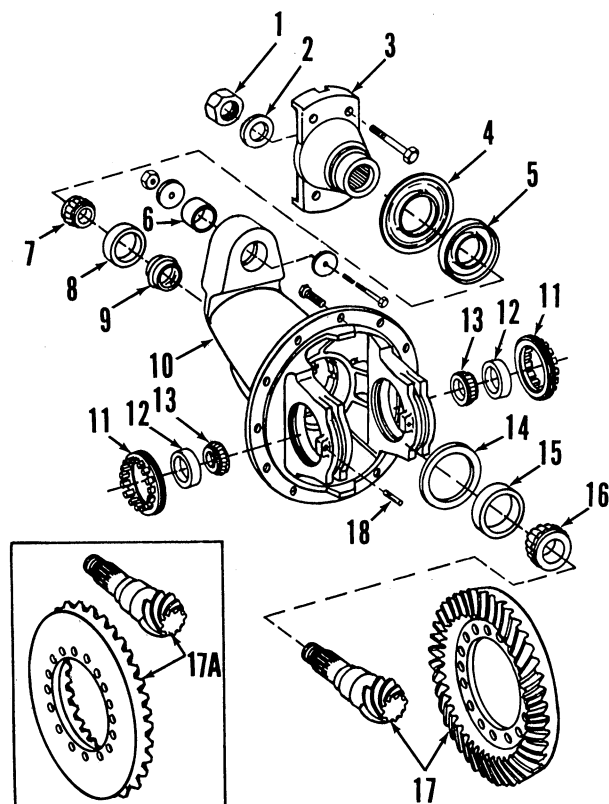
Exploded view of bevel pinion and carrier assembly used on Models 4050, 4250, and 4450. Note that installed position of ring gear (17) for tractors equipped with Power Shift transmission is opposite installed position of gear (17A) for tractors with Quad-Range transmission.
